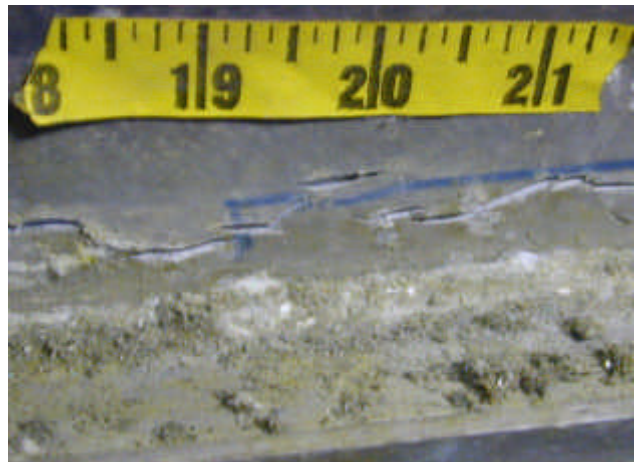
M/V *JET CAT EXPRESS* - Shell plating illustrating both stress corrosion cracking and pitting
